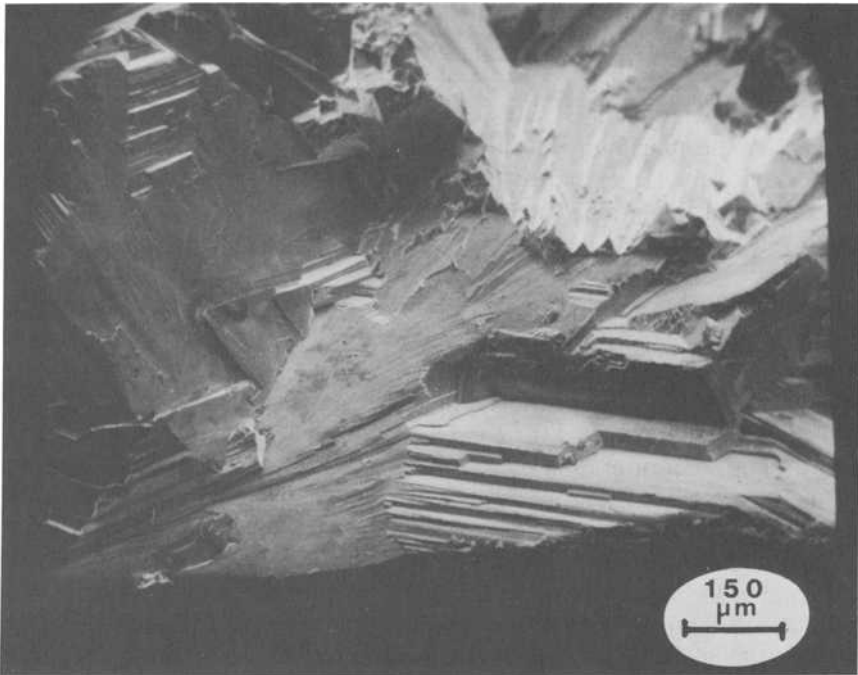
Extensive Stage I cracking in an LCF failure of a Udimet 700 compressor blade.
